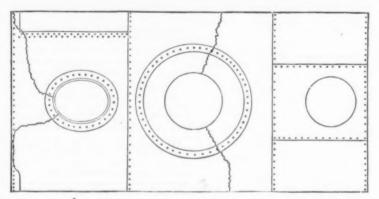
Exploded Tug Boat Boiler.—Plan Showing Steam Dome, Manhole and the Location of the Cracks.
